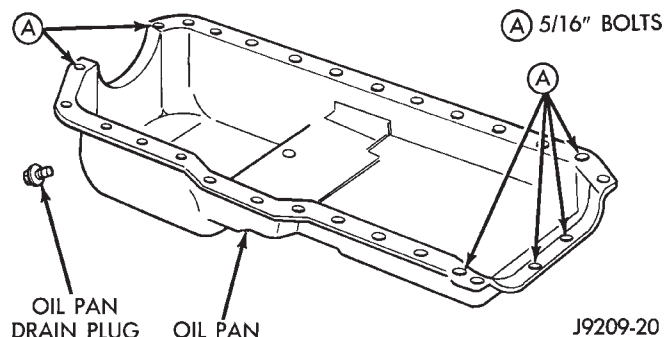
Position of 5/16 inch Oil Pan Bolts
